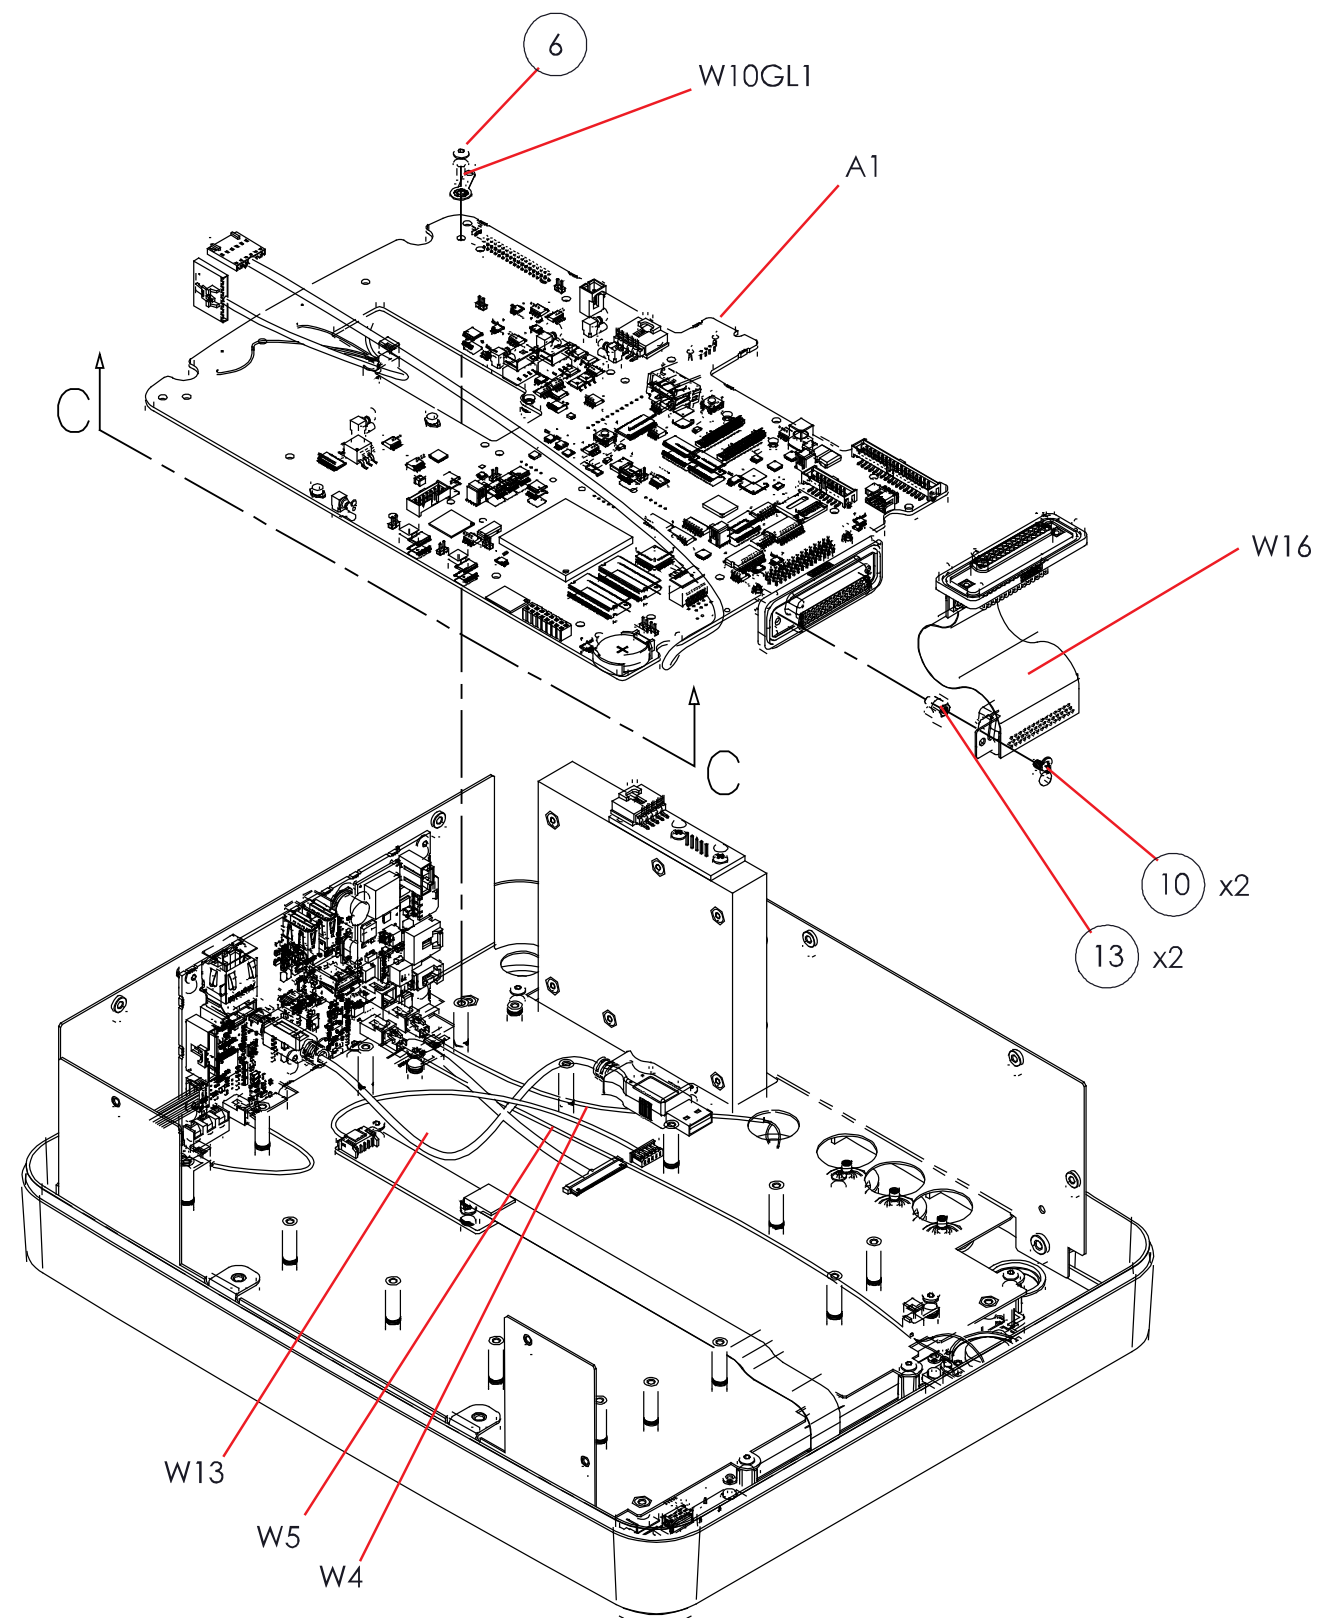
Front Chassis / Panel Assy (Sheet 4 of 6)
